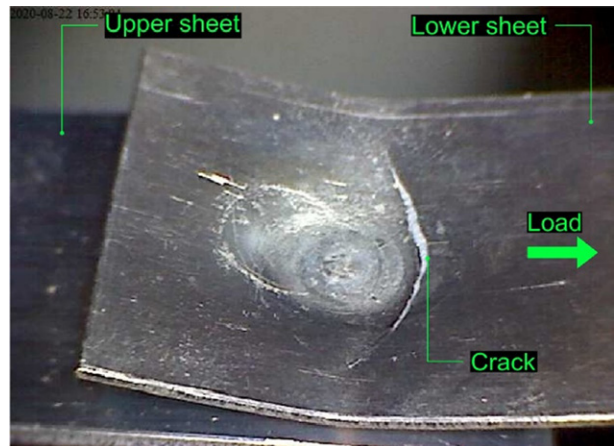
View of the lower sheet with a visible crack due to tensile stress at the perimeter of the weld
